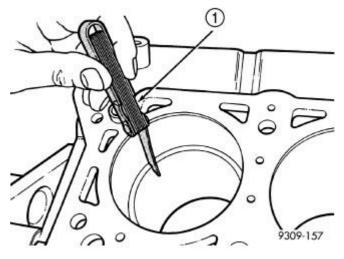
Check Gap on Piston Rings Courtesy of CHRYSLER LLC
